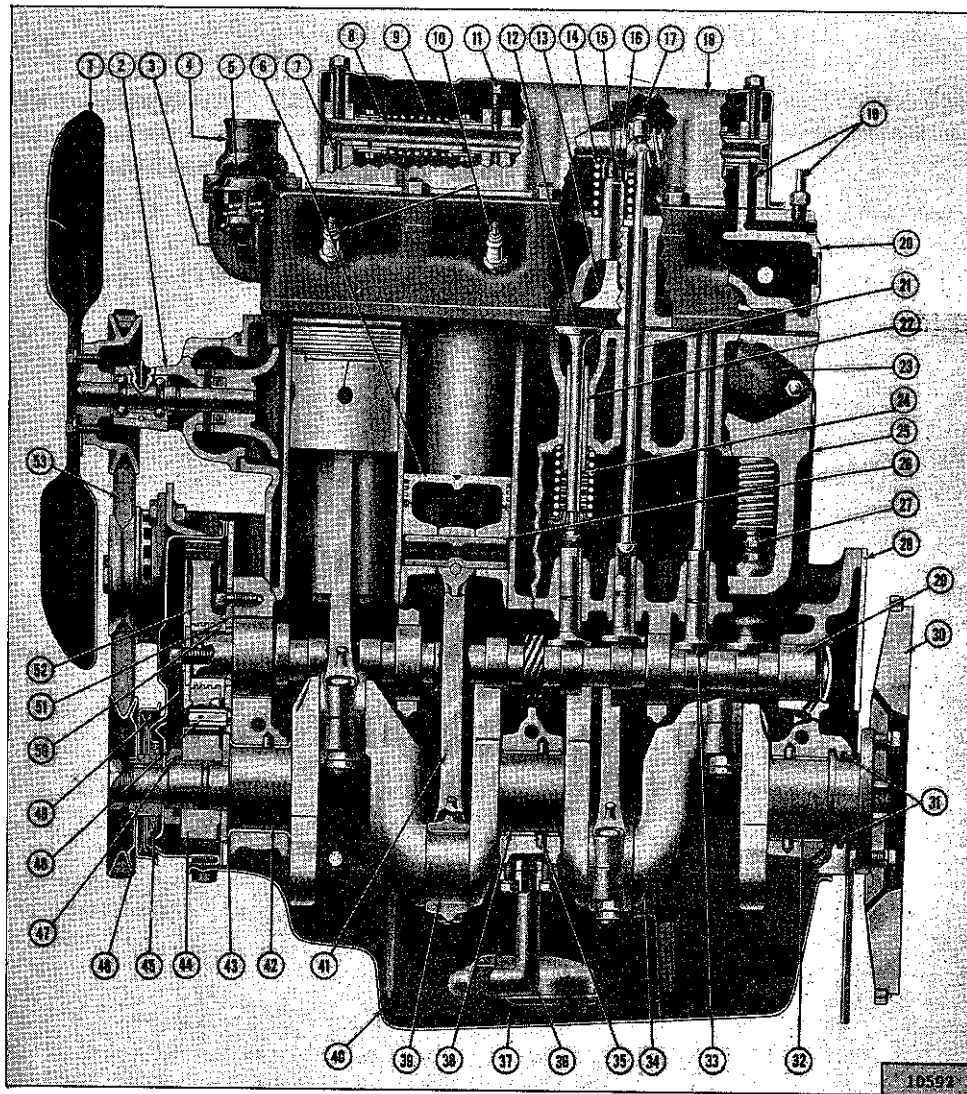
SIDE SECTIONAL VIEW OF F4-134 ENGINE
